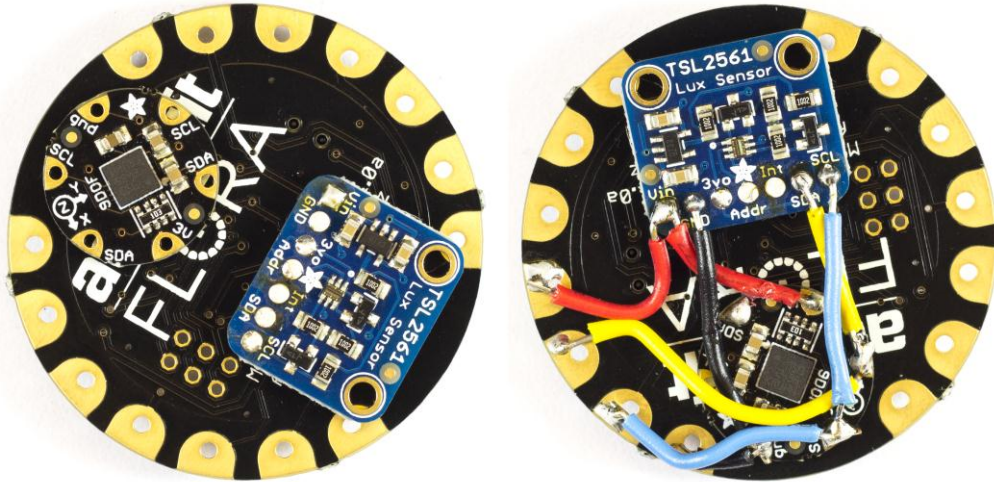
The TSL2561 and accelerometer connected and soldered to the FLORA
